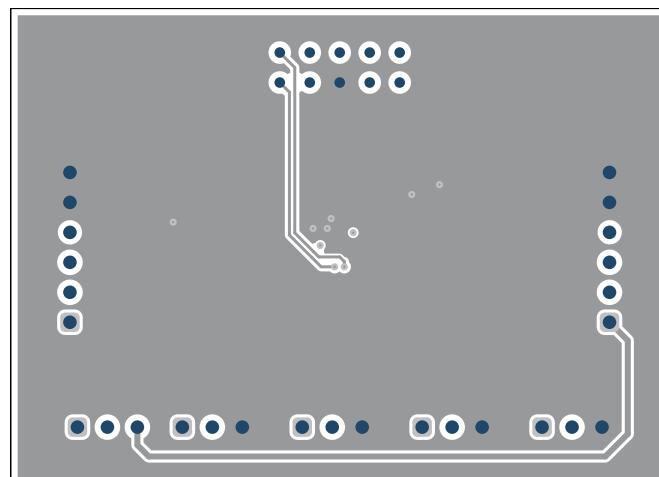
TPS6286x0EVM PCB - Signal Layer 2 (Top View)
